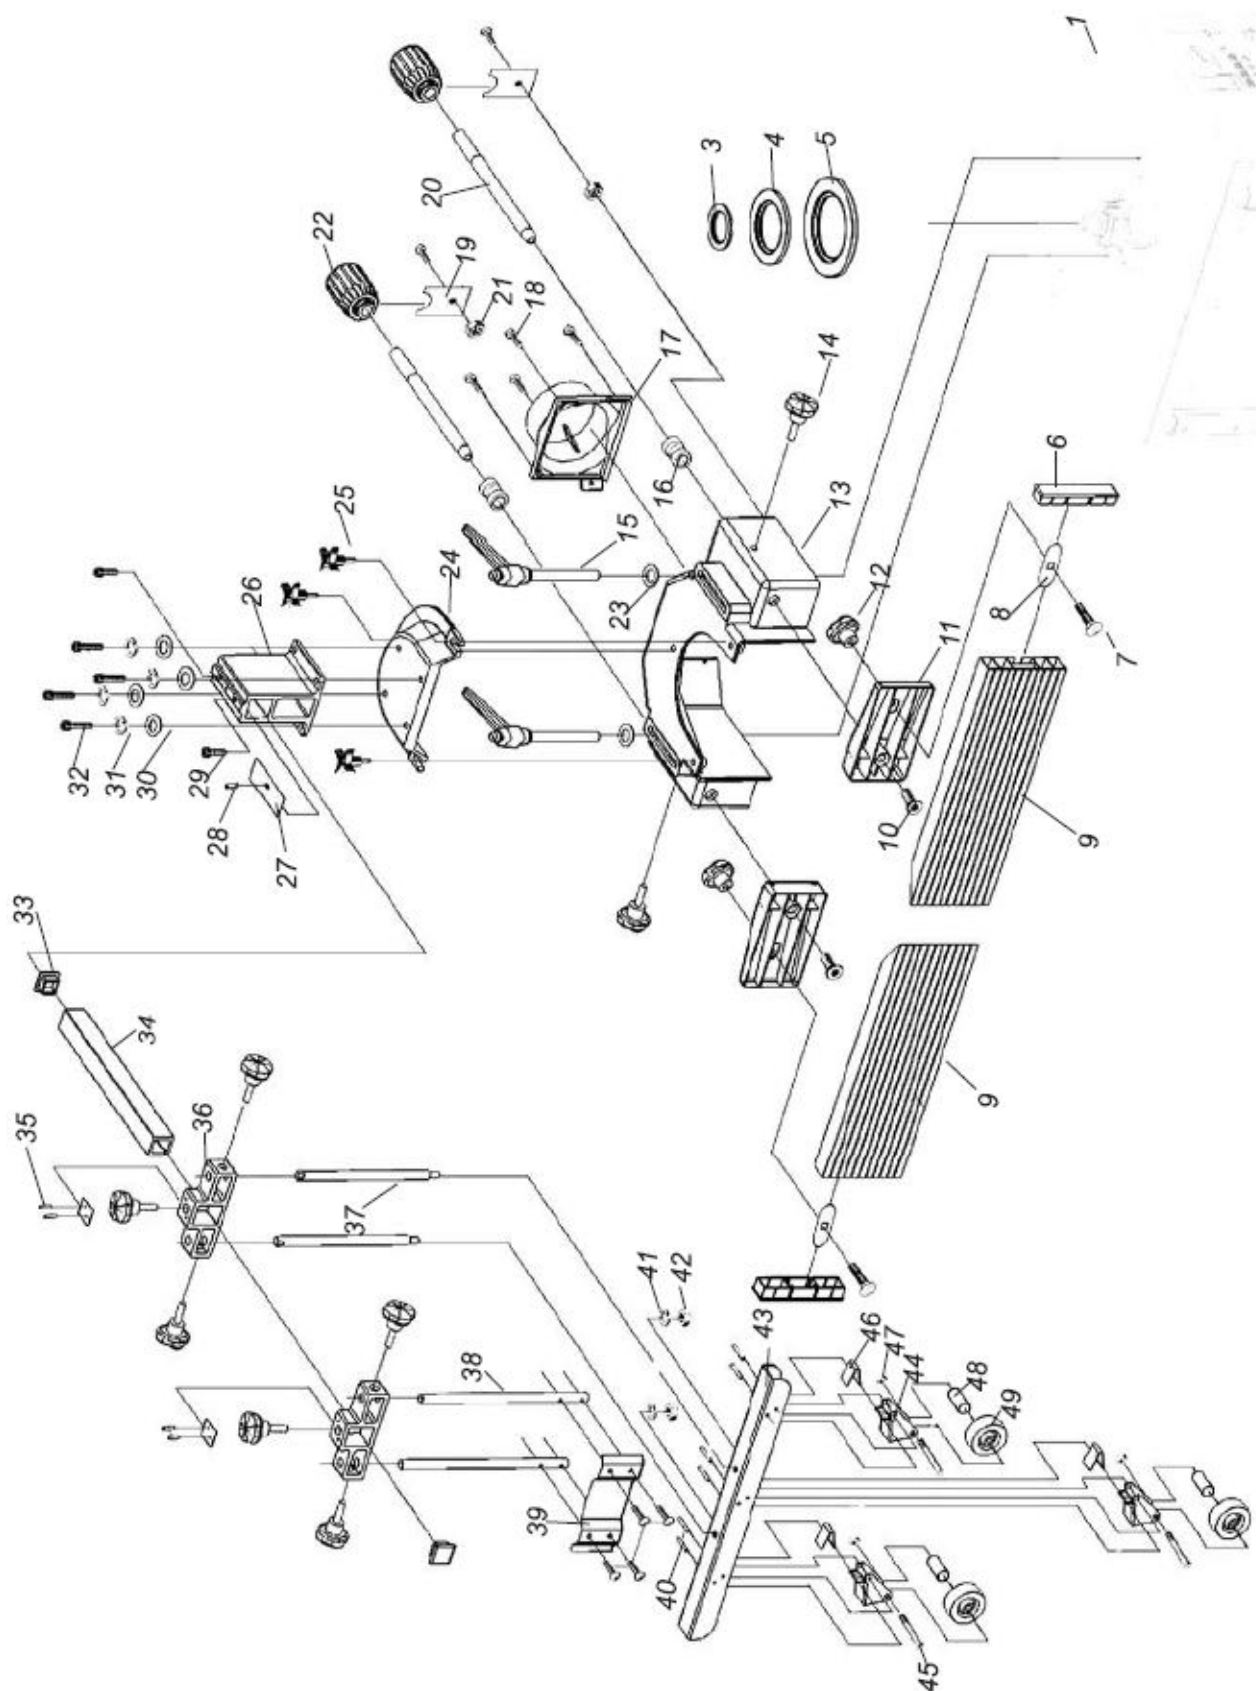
Spare parts drawing 2 - Table router TF 190 E
